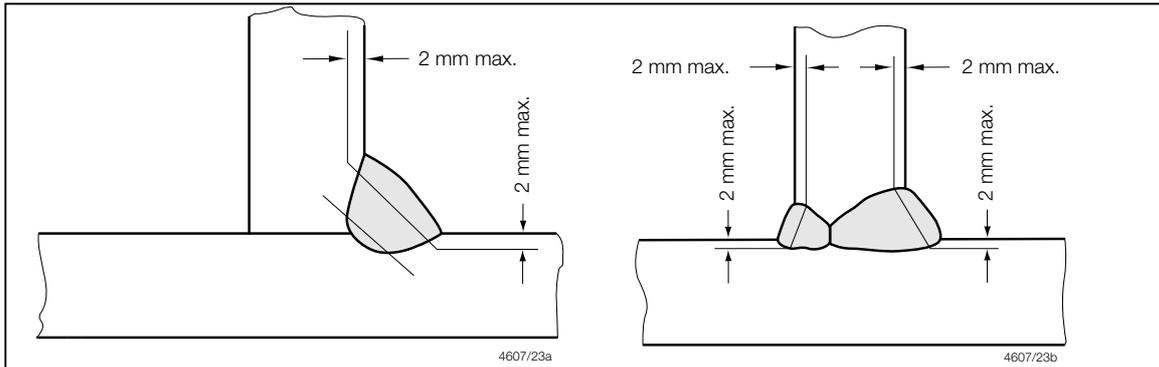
A.3 Indication of the general location of hardness surveys in fillet welds and in T-welds
